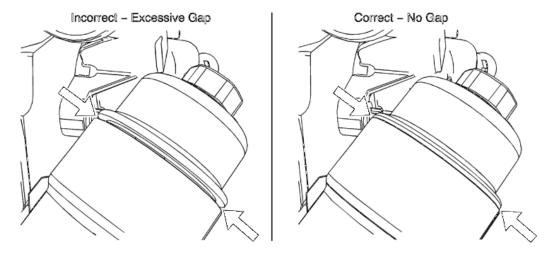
Oil Filter Cap Seal Ring Courtesy of GENERAL MOTORS COMPANY
